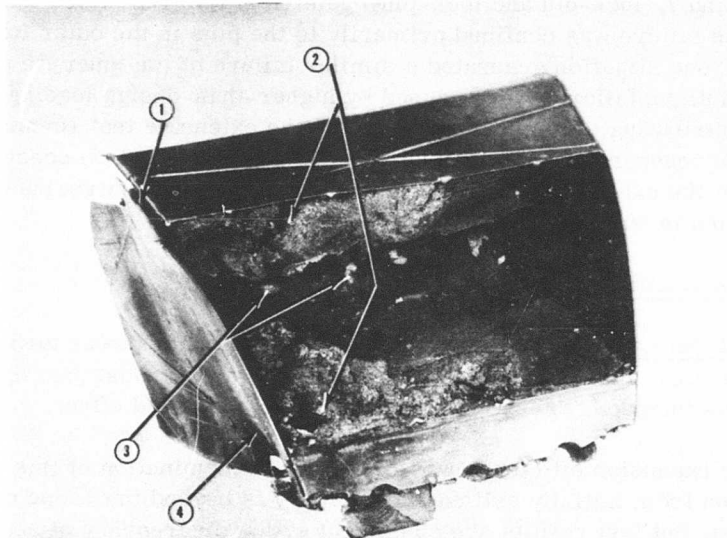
Front View of Burned Outer Matrix Package: (1) Broken Weld, (2) Burned Screen, (3) Fused Screening, (4) Buckled Side Plate.
